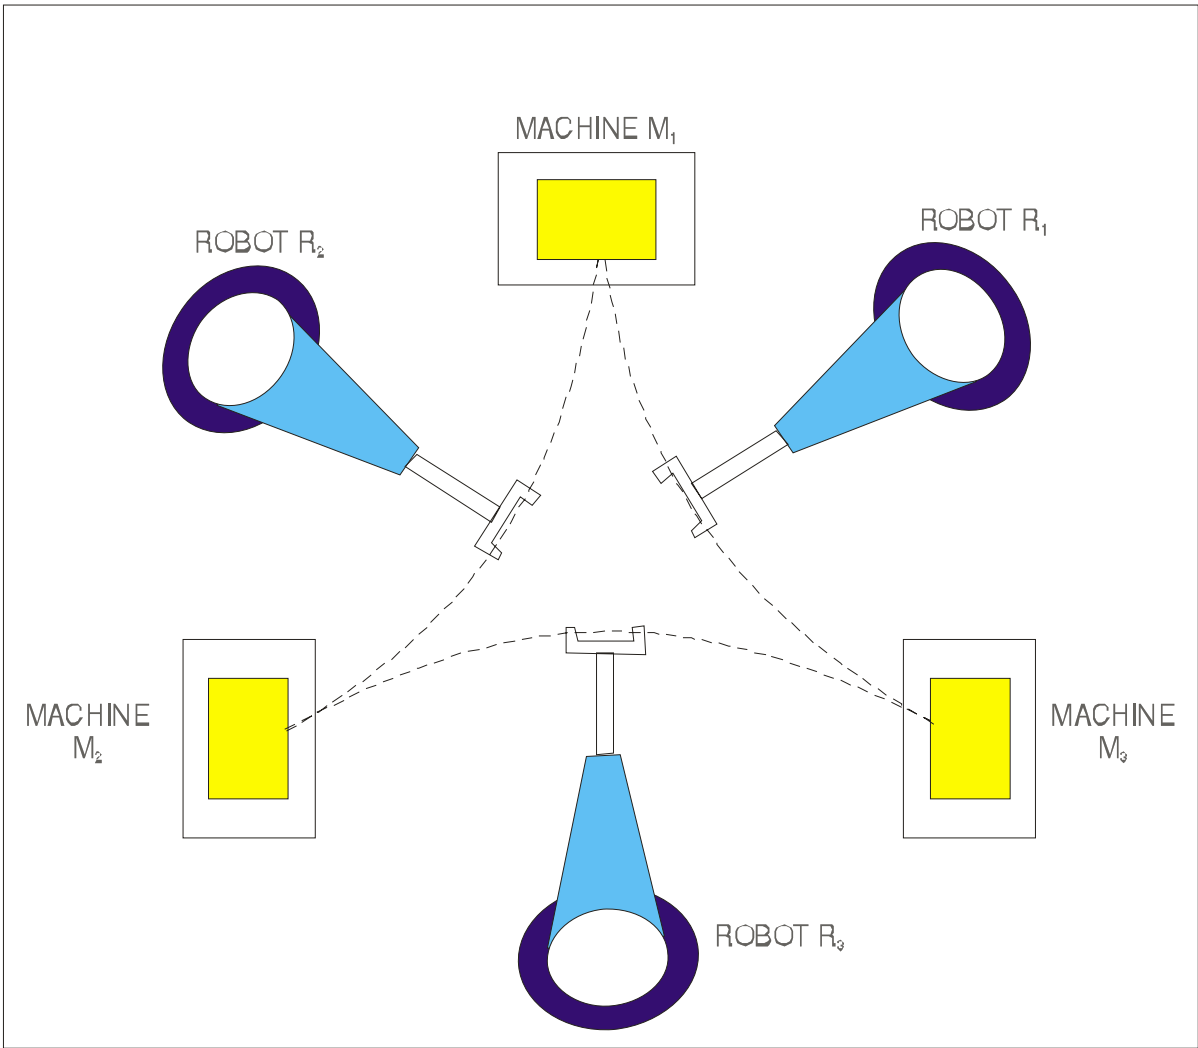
(A) LAYOUT OF AN FMS CELL COMPRISING THREE MACHINES AND THREE ROBOTS
